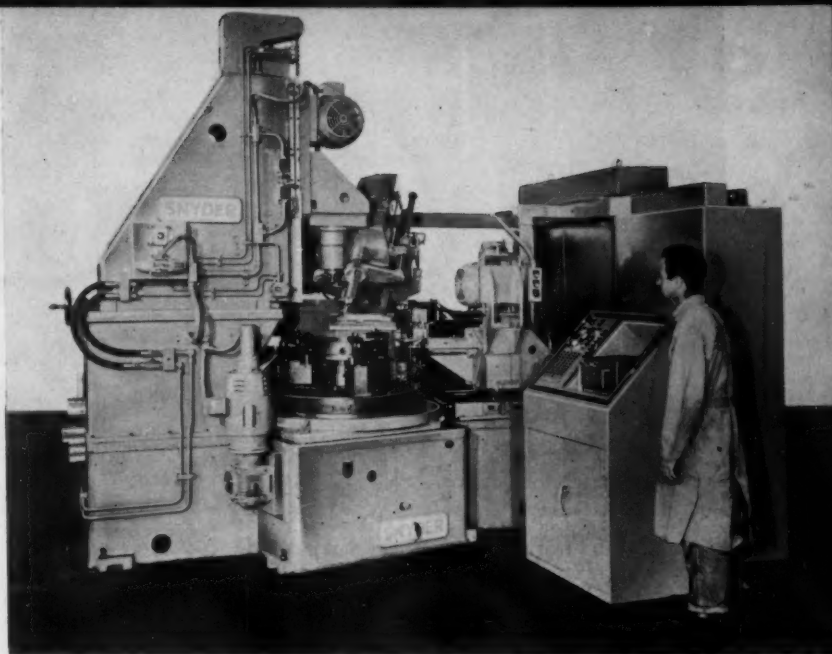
Snyder numerically controlled, dial-index special machine set up to drill, counterbore, and ream a diesel-engine flywheel
